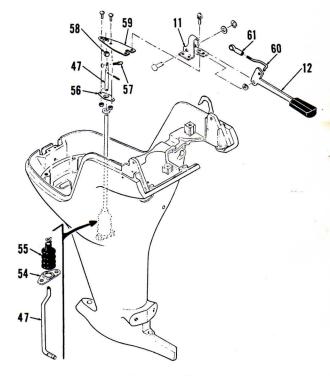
View of shift linkage for McCulloch 7.5 with Standard Drive. Early (1963) motors use set screw (S) and flat (F) on side of rod (47). Later (1964) motors use roll pin (R) through hole (H) in shaft and snap ring (E) in groove (G) at top.
